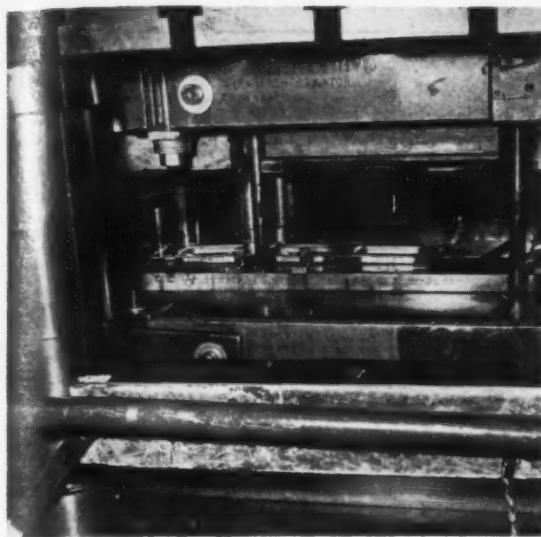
Setup of the progressive die for producing the base stamping in a Brandes dieing press. The head is reciprocated by sliding tie bars from a cam in the base of the machine.
